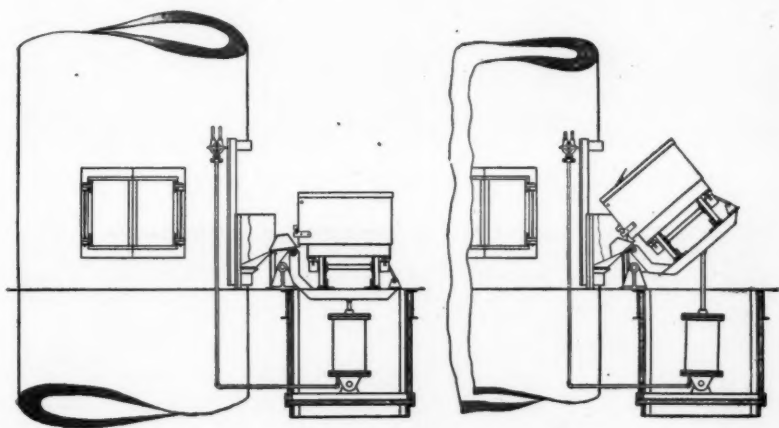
SIDE DUMP CHARGING MACHINE.
